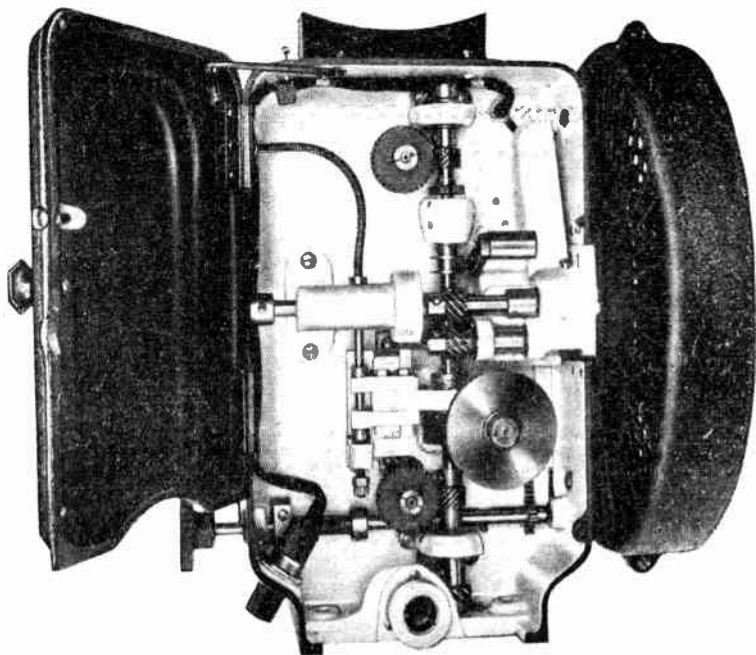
Photograph showing driving side of *Century* single shutter projector mechanism. The horizontal shaft is that of the shutter. The gears through which the vertical shaft drives the lower sprocket, intermittent movement and upper sprocket are clearly seen. These shafts are provided with ball bearings.
